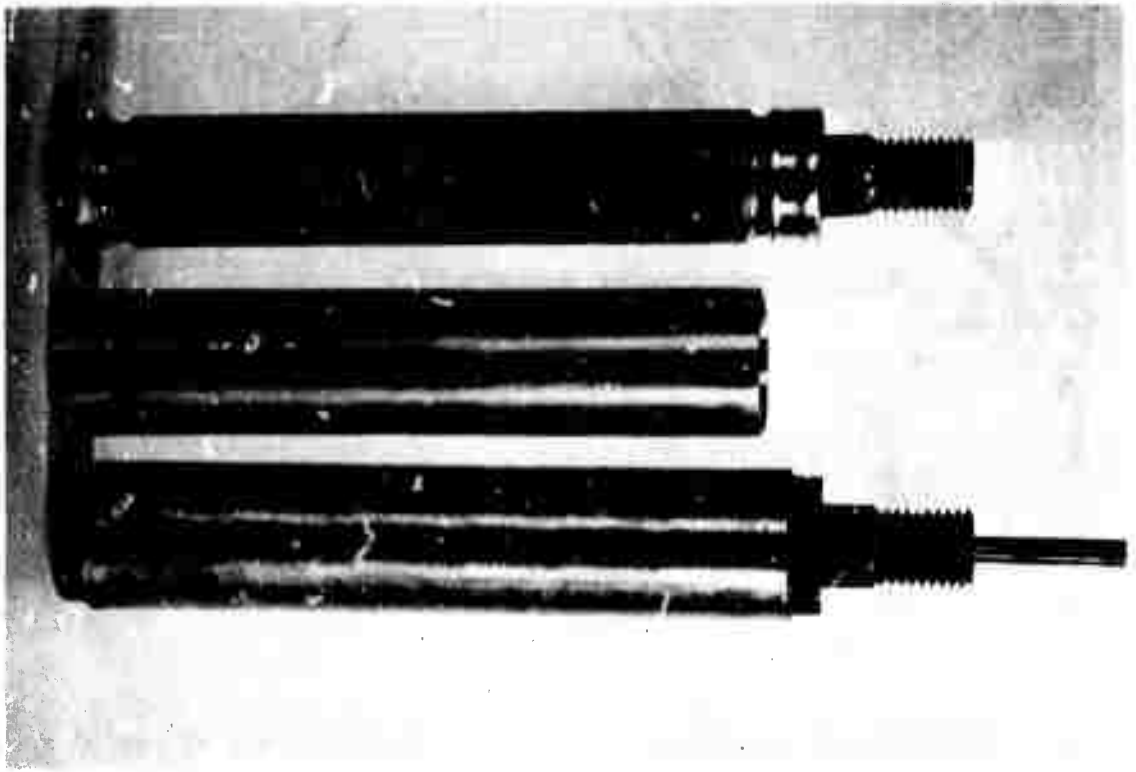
Cylindrical pressure cell, showing core, 1.5-inch shell, and brazed assembly.
